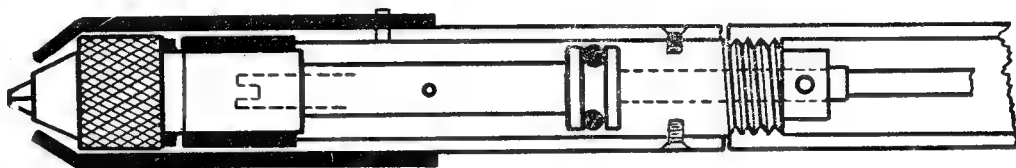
General arrangement, showing removable chuck cap hood and disposition of items composing the rear thrust-bearing and terminal securing collar. (Not to scale)
